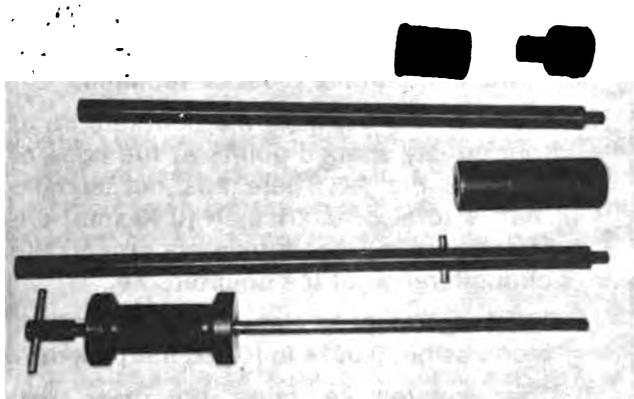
ST-1228 Camshaft Bushing Drive
